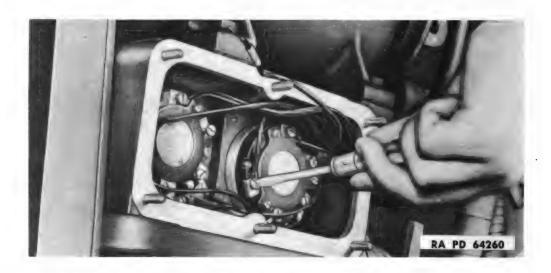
Disconnecting Wires from Oil Gear Synchro-transmitter
